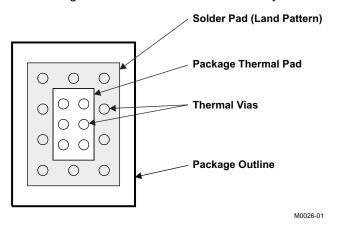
Package and PCB Land Configuration for a Multilayer PCB
